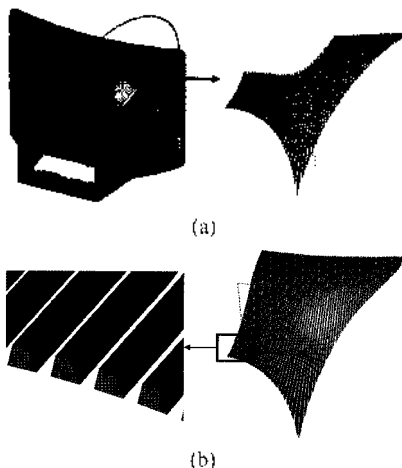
Core parts for creating ventilation holes of a CRT TV (a) after trimming, (b) before trimming.
